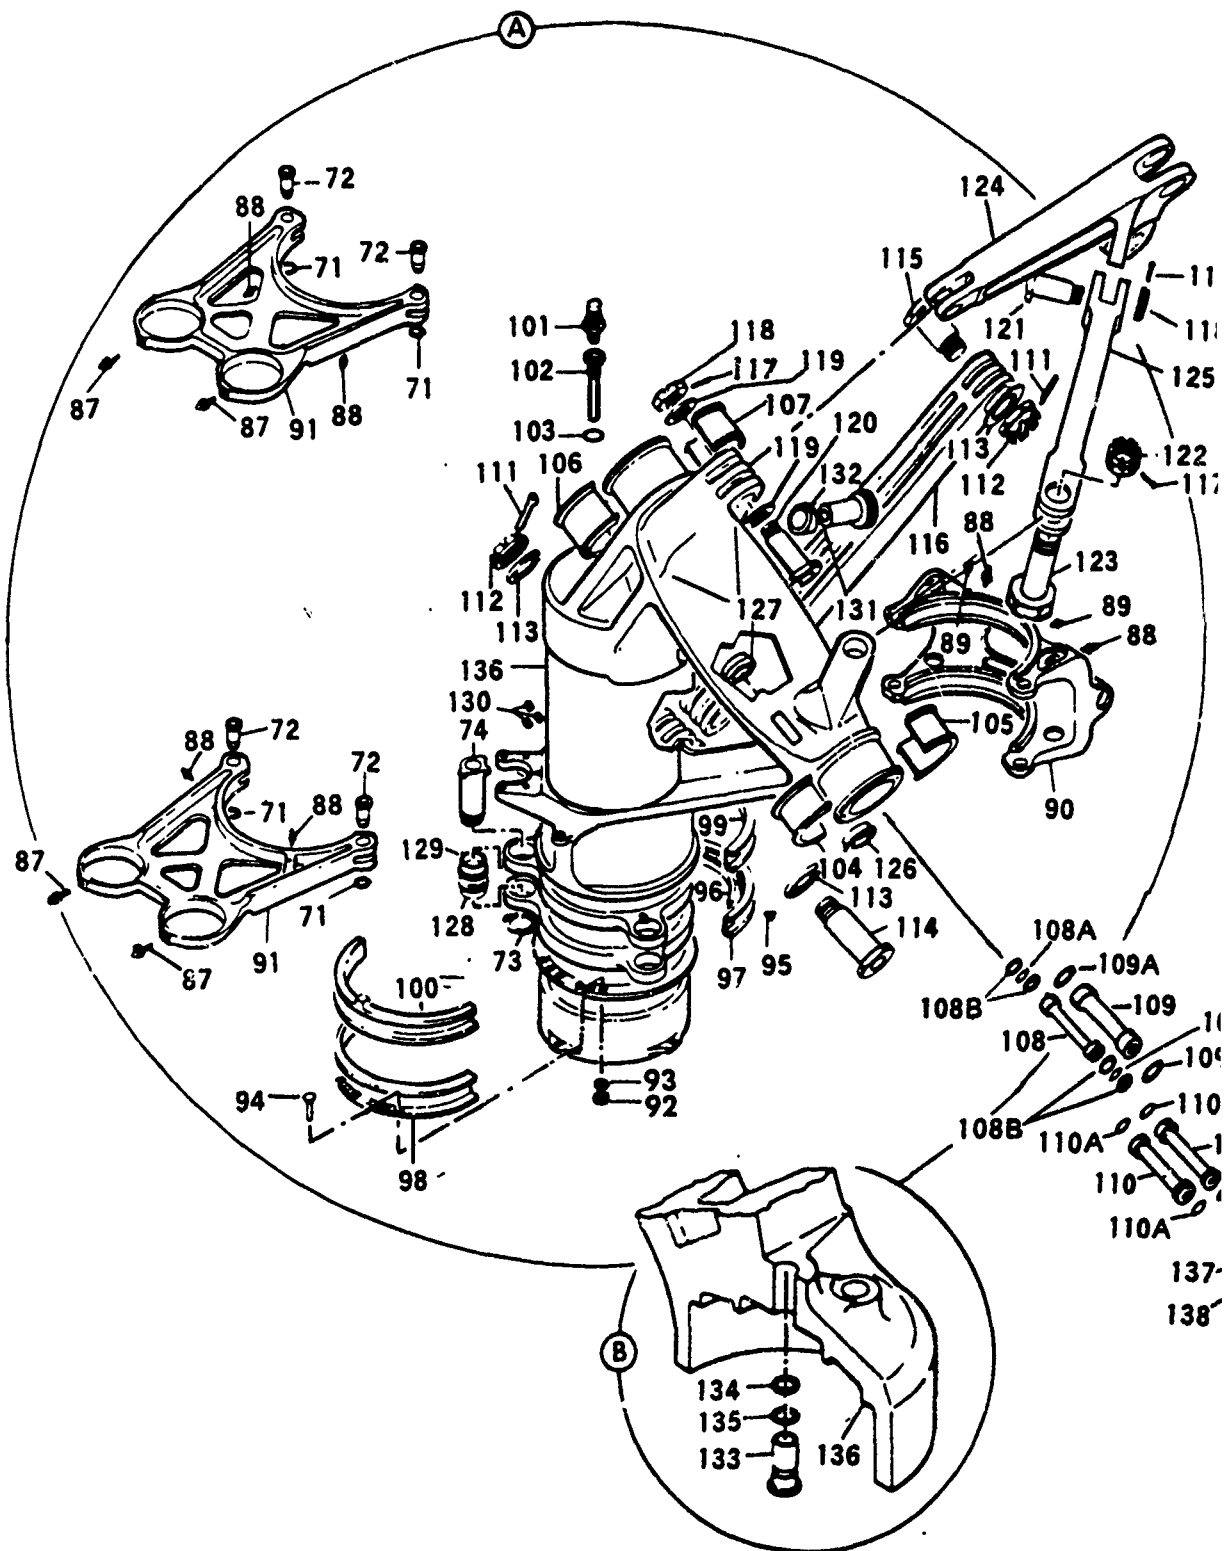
Main Landing Gear Strut Assembly (Sheet 3 of 4)
